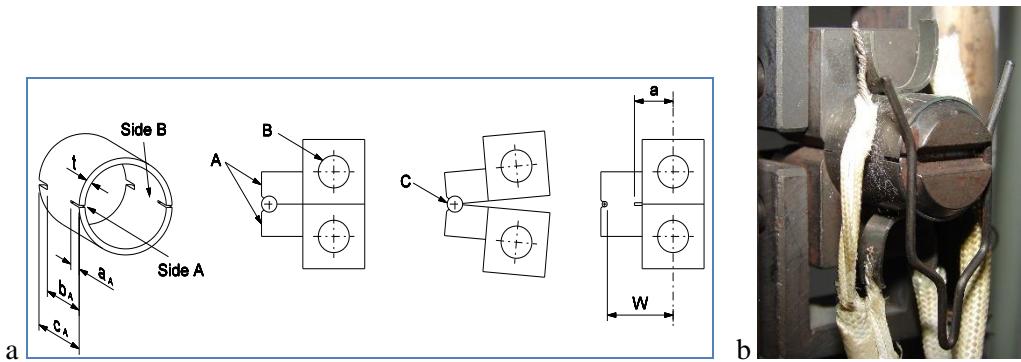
Schematic diagram of the PLT specimen (a), fixture and specimen-fixture assembly (b)
